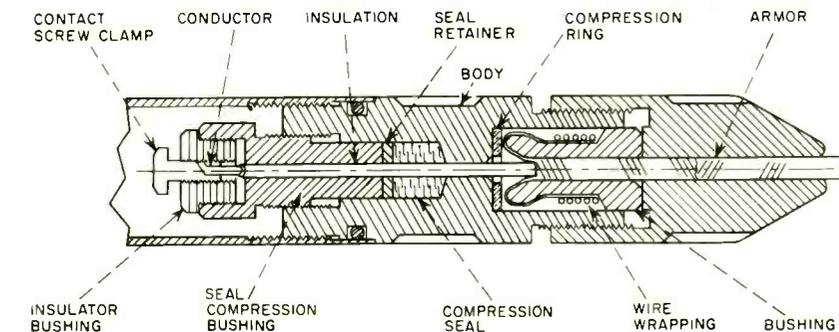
Cross-section of cable-head assembly shows details of method used to seal probe against pressures which may rise as high as 2,000 psig
